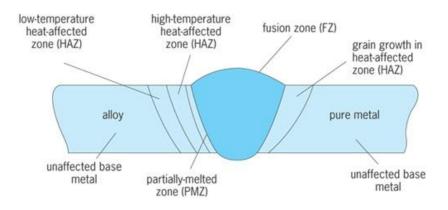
Distinct zones of Weld Joints (Kalpakjian, 2010)
